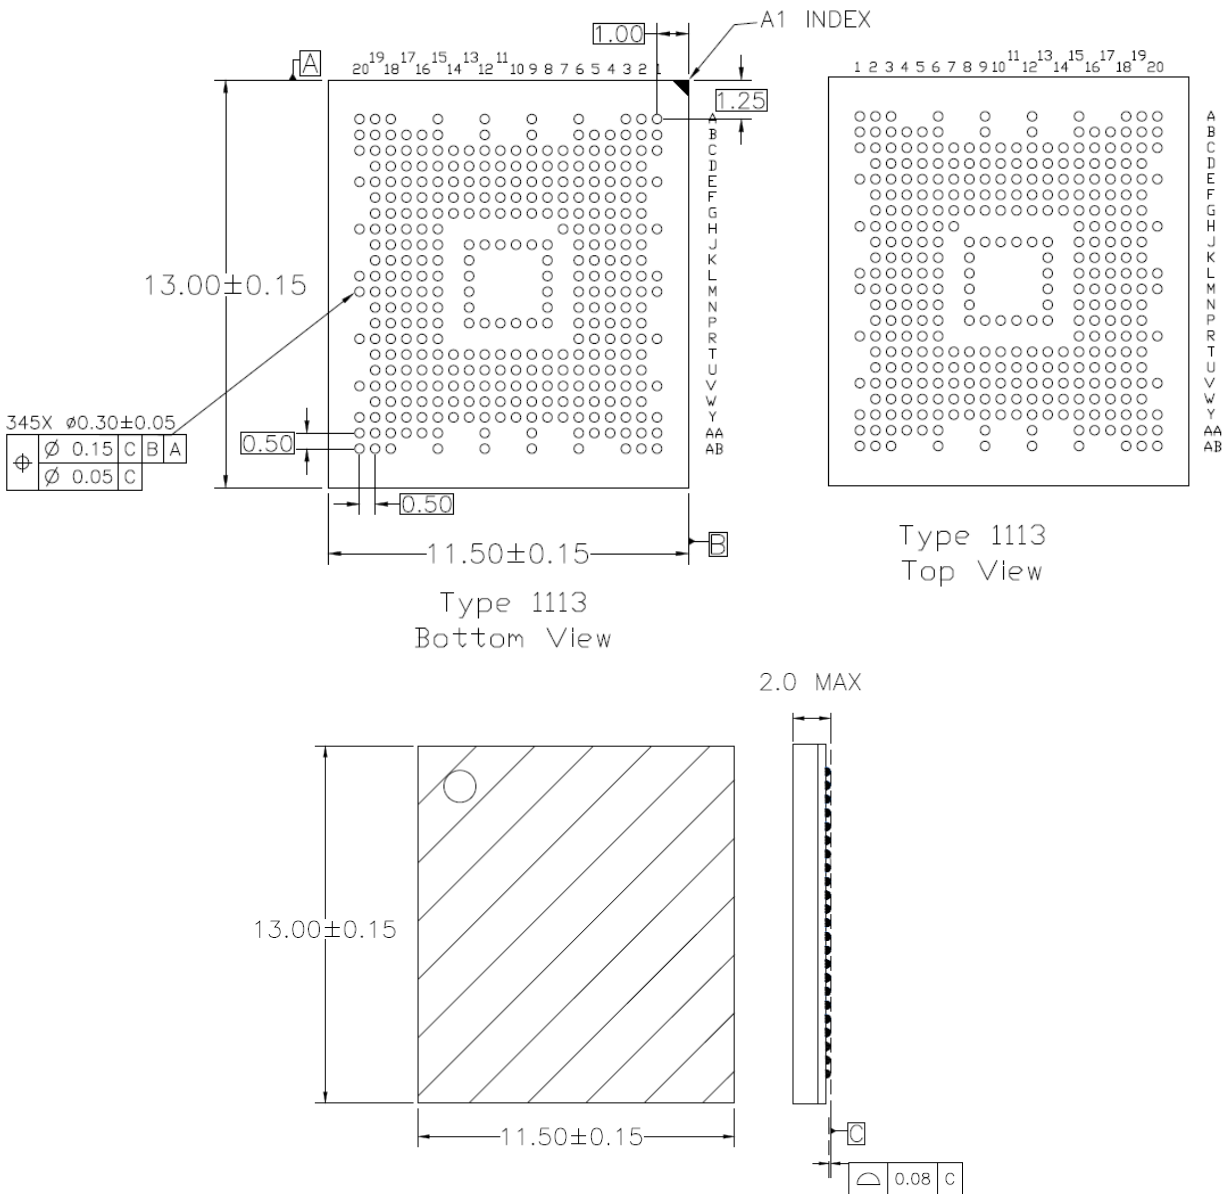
Type 1113 S5 Mechanical Outline Drawing Example
